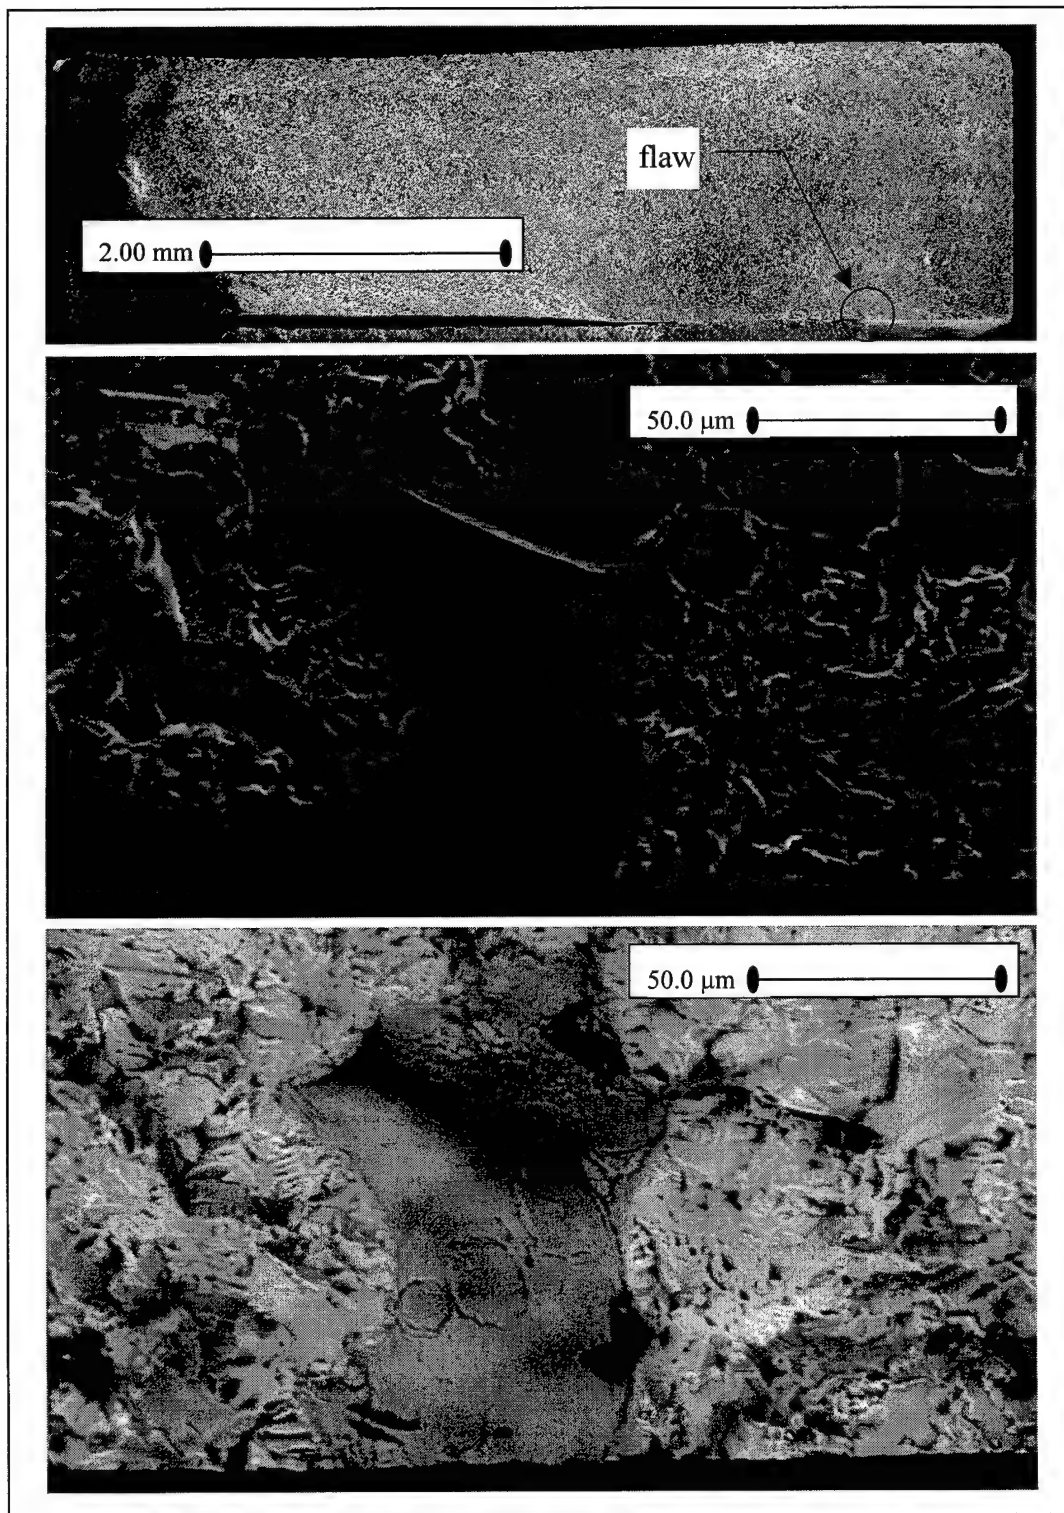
Overview and detail view of Specimen B1 (20:1 taper) fracture surface, subject to 360 MPa (52 ksi) tension-tension fatigue testing. Failure occurred at 101k cycles. A close-up of the crack nucleation site shows that the conclusion fell out after fracture. Trace amounts of calcium and magnesium were evident in the reaction zone left behind
